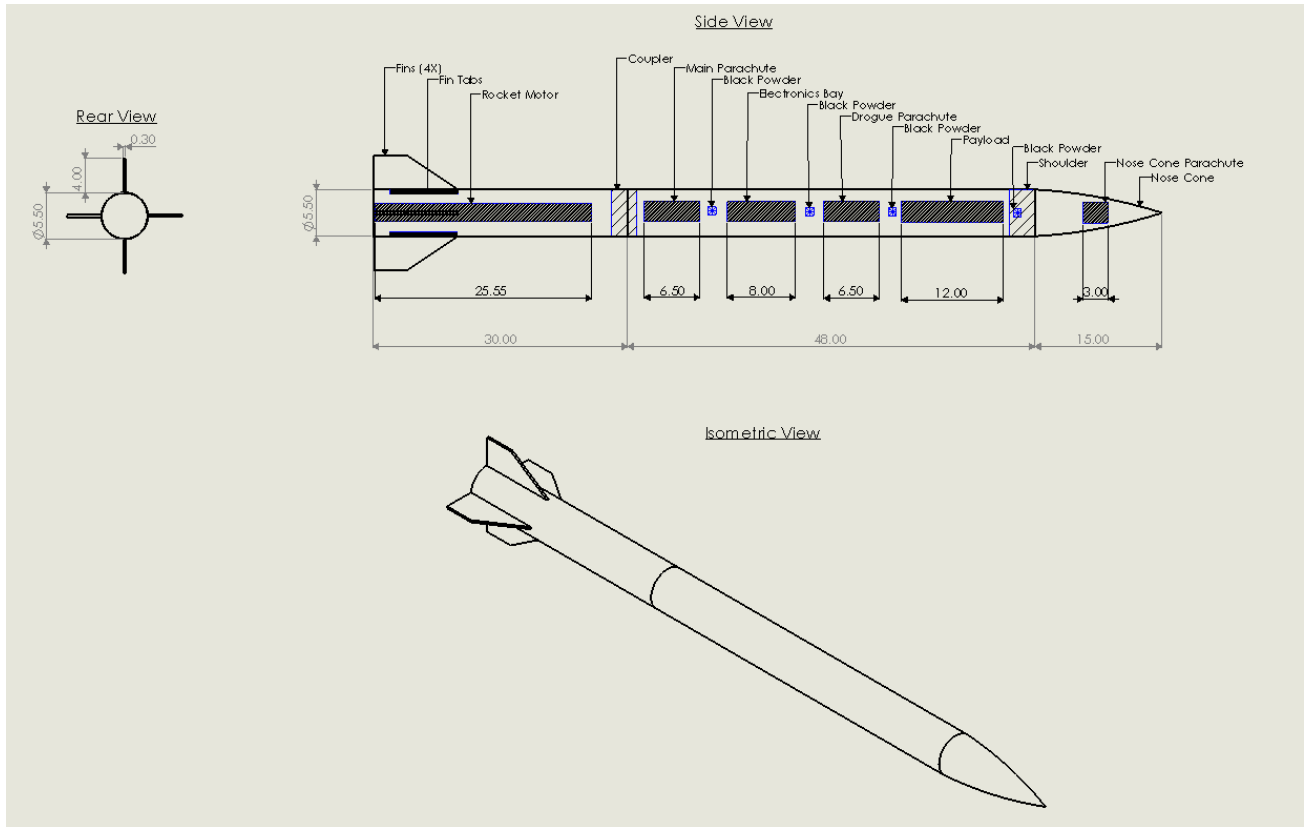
Drawing of Launch Vehicle (dimensions in inches)
